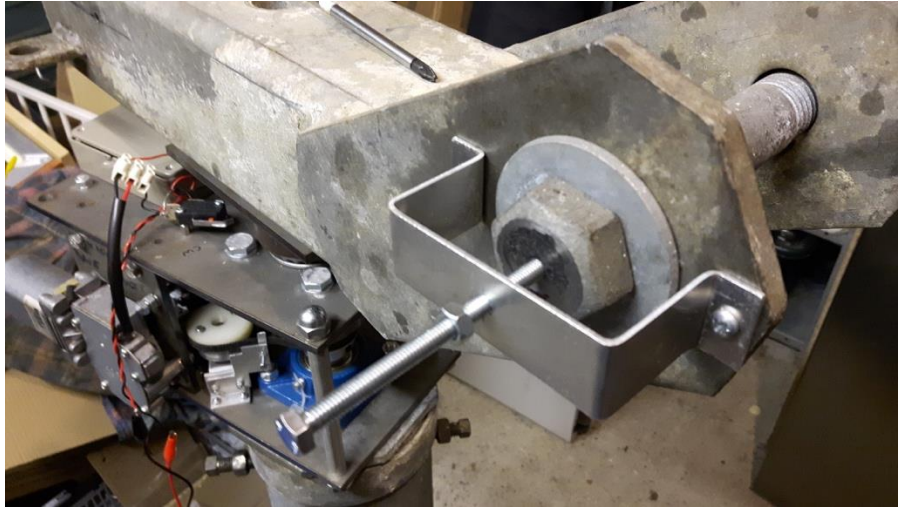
Locating jig for the on-axis elevation sensor bracket.
